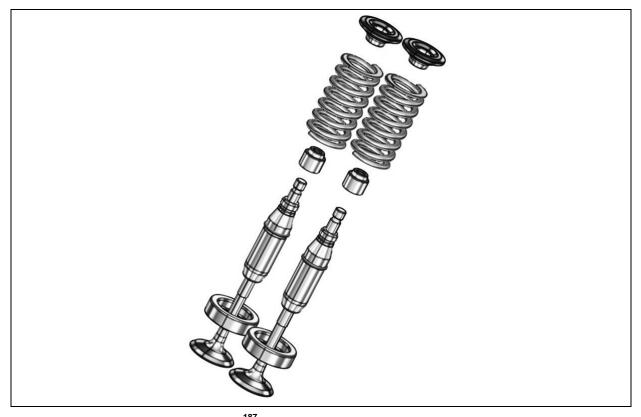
Intake Valve Group (XY150)¹⁸⁷
